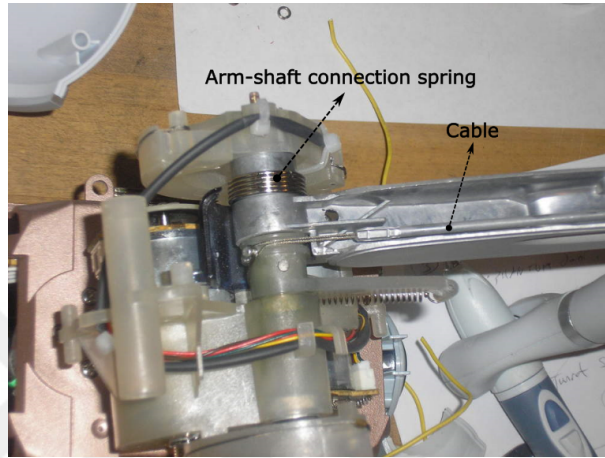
Internal parts of the Geomagic[®] Touch[™] (formerly PHANToM[®] Omni[®]) device*: connection of the arm and rotor shaft.
